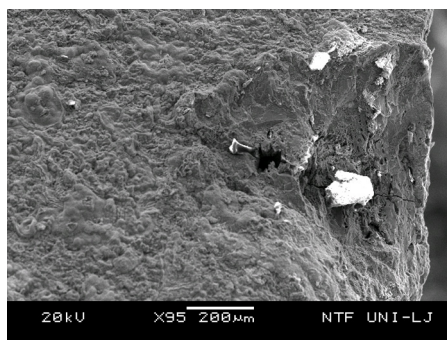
The fracture initiation surface of a coil spring, covered with corrosion products and secondary cracks.
